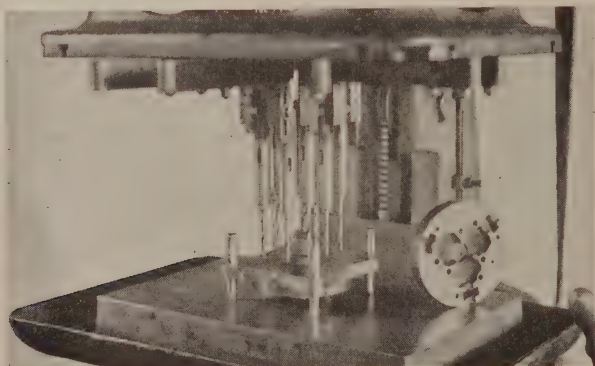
Shows the setup of a multiple-spindle drill (Fig. 8), also the jig used for drilling the body of a lathe chuck, shown at the right.
